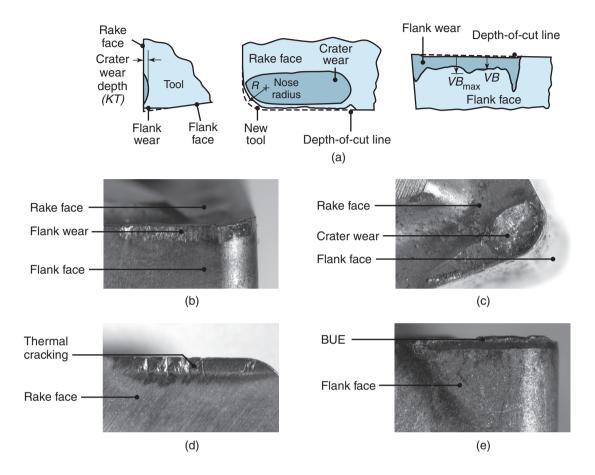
(a) Features of tool wear in a turning operation. The VB indicates average flank wear. (b)–(e) Examples of wear in cutting tools: (b) flank wear, (c) crater wear, (d) thermal cracking, and (e) flank wear and built-up edge. *Source:* (a) Terms and definitions reproduced with the permission of the International Organization for Standardization, ISO, copyright remains with ISO. (b)–(e) Courtesy of Kennametal Inc.
